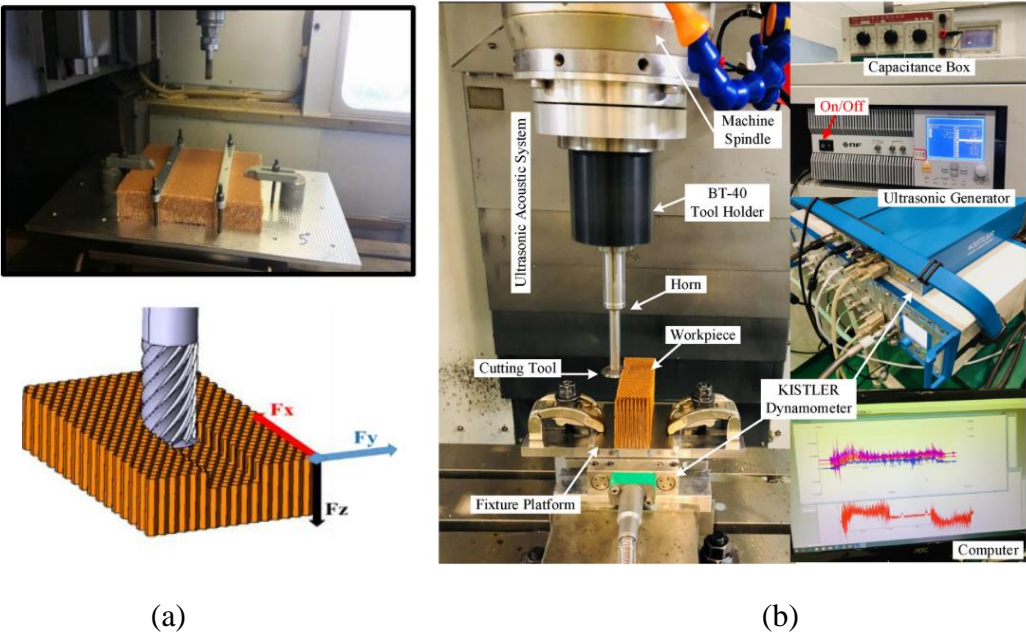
(a) Machining of Honeycomb Cores. (b) Ultrasonic Machining of HC Core.
